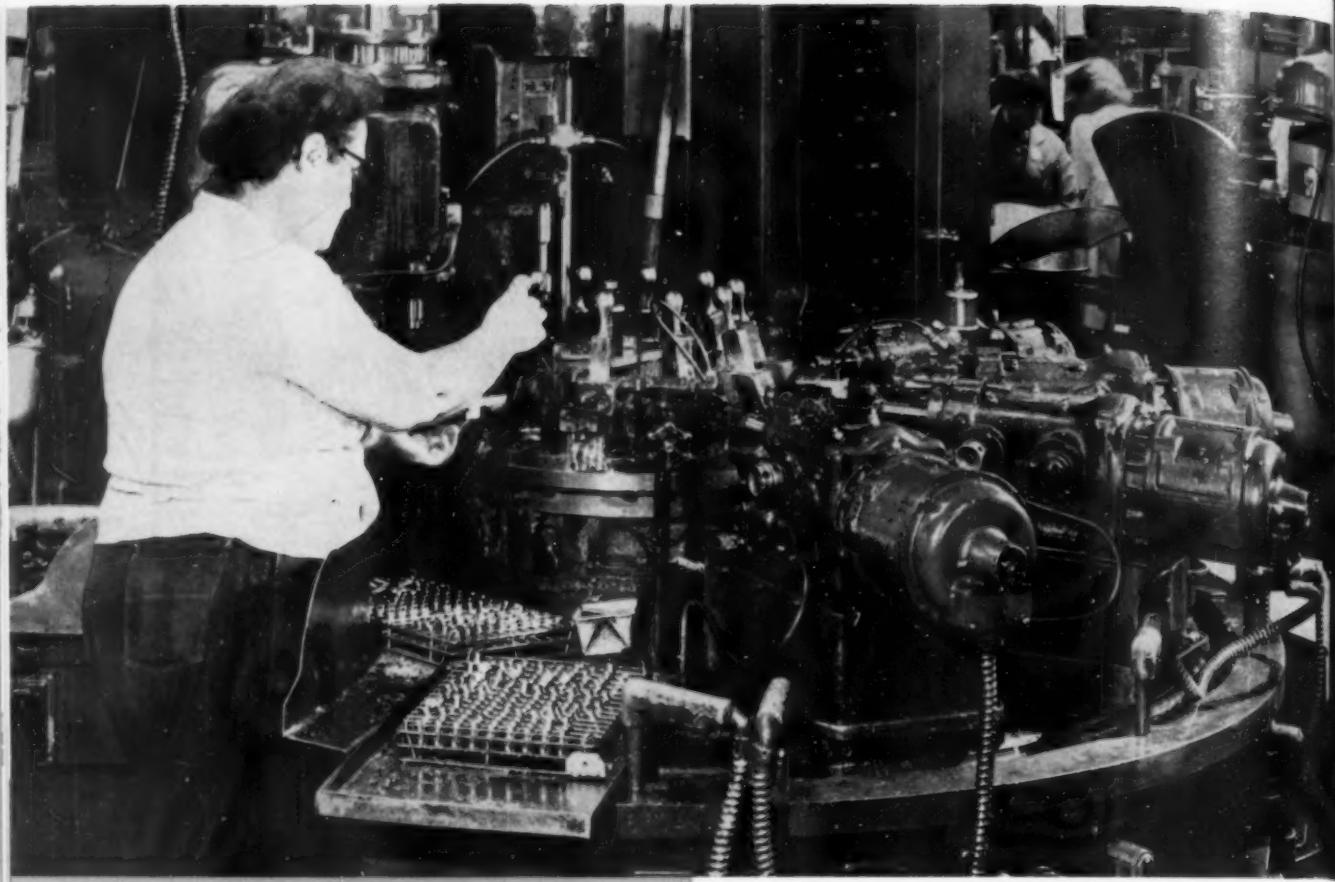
Special machine made of standard drilling heads for producing tumbler holes in cylinder plugs.
